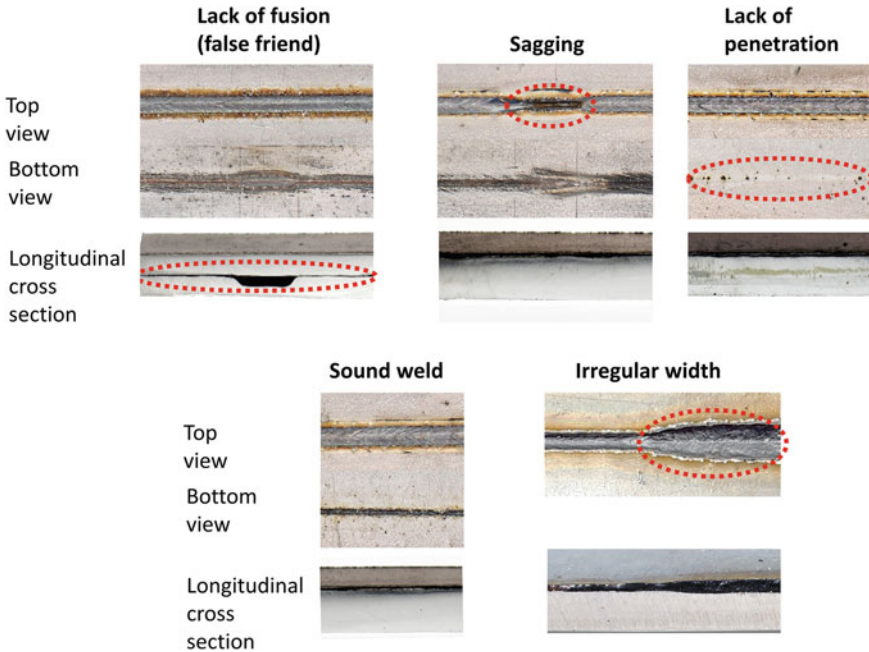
Photographs from different perspectives of welding defects
